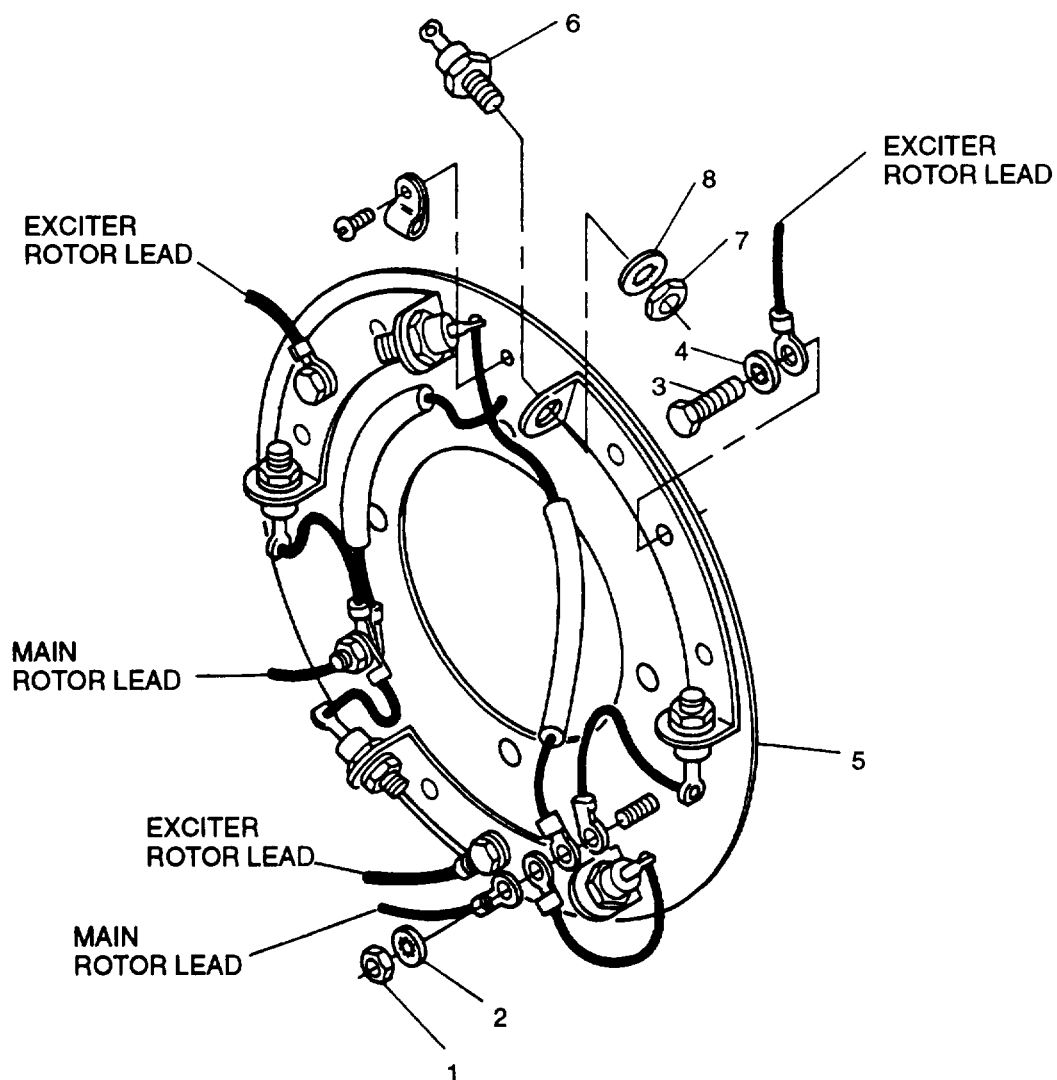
Rectifier Assembly (MEP-814A)
